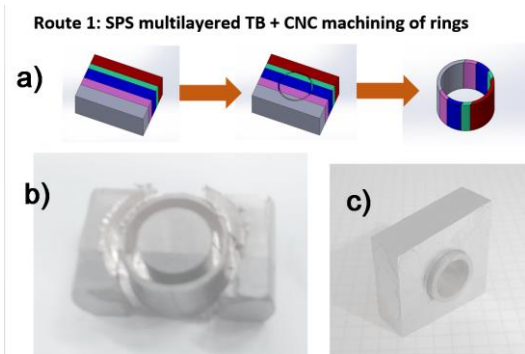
Processing route for thermal barrier rings with gradual composition: a) process schematic; b) machined ring with 3 different layers; c) W-monoblock with inserted ring.
